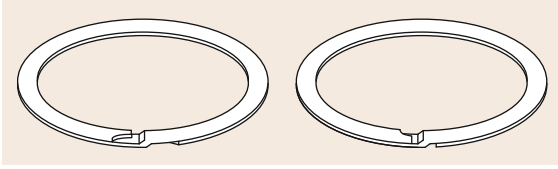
Spiral rings for holes (*left*) and shafts (*right*)
